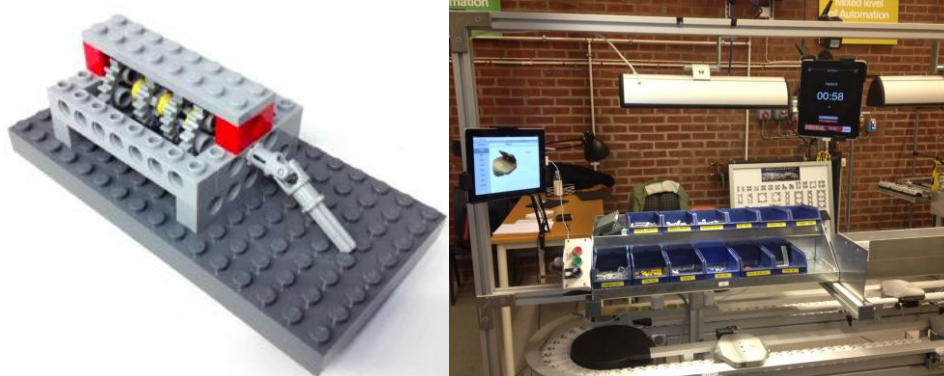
Lego gearbox assembled in the experiment (left) and experiment set-up (right).
